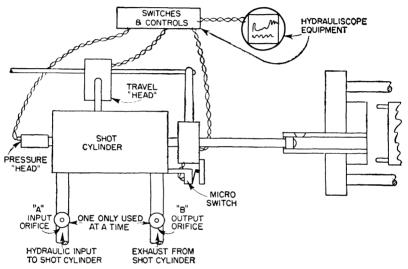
How the Hydrauliscope and auxiliary apparatus are connected to the shot end of a cold-chamber machine.
